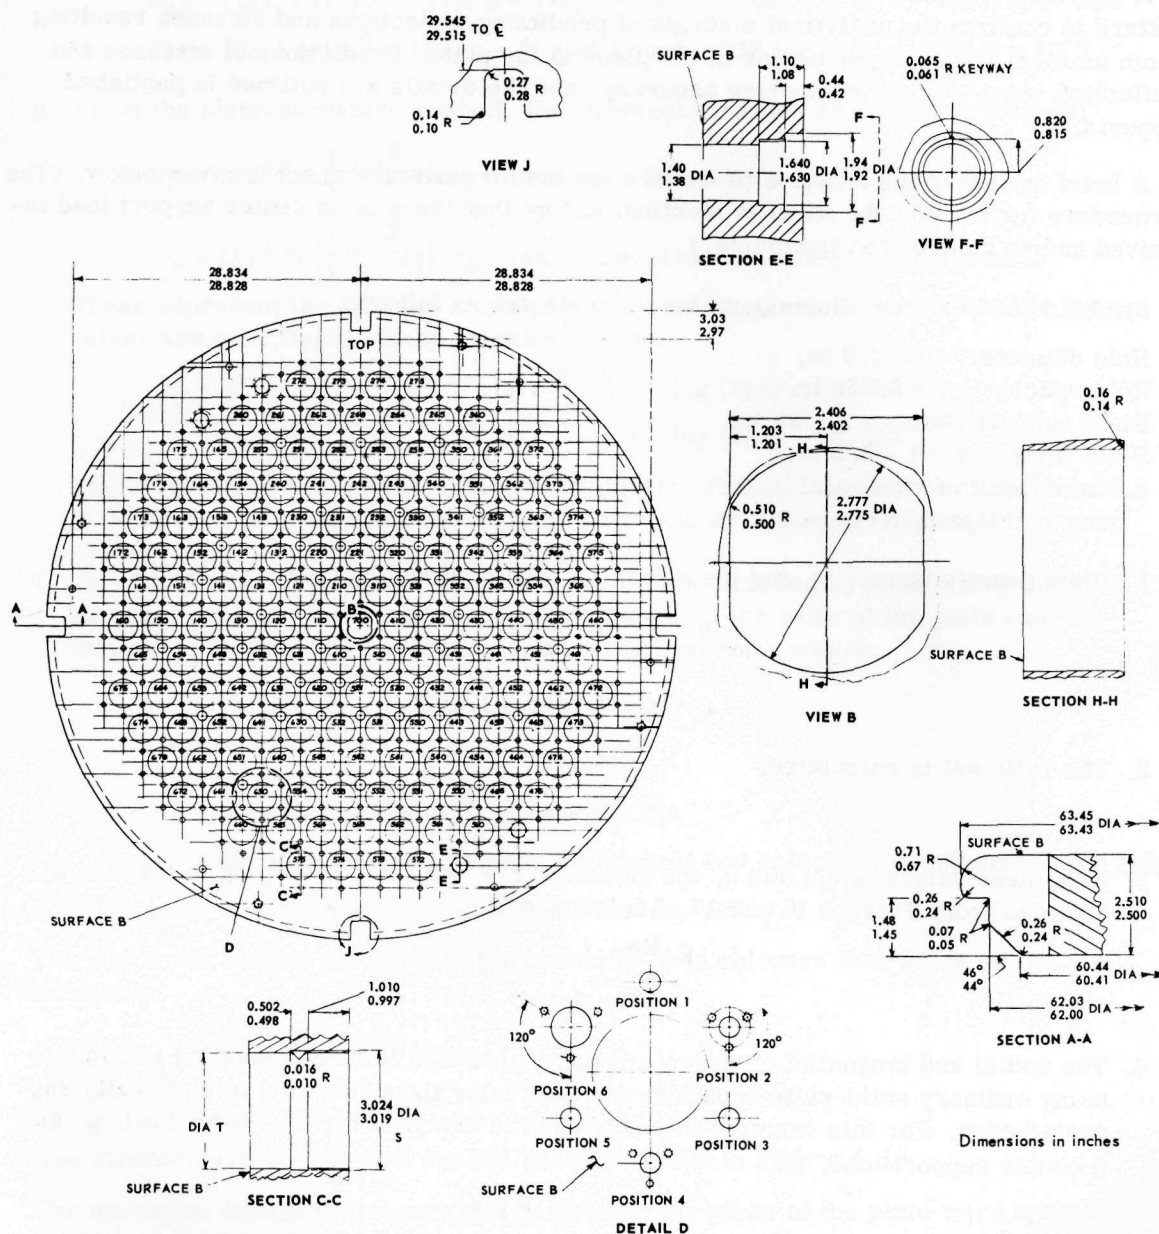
Front tube sheet detail (Dwg. 628E631)
